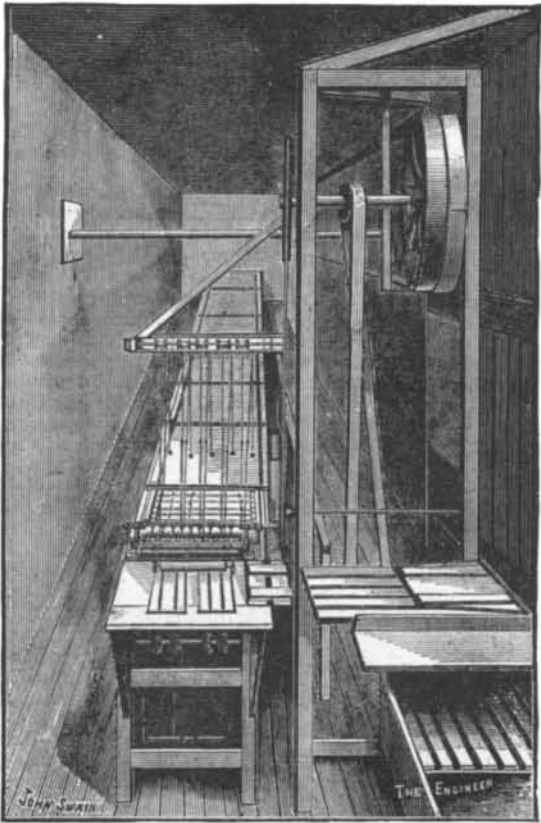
GENERAL VIEW OF COATING MACHINE.
